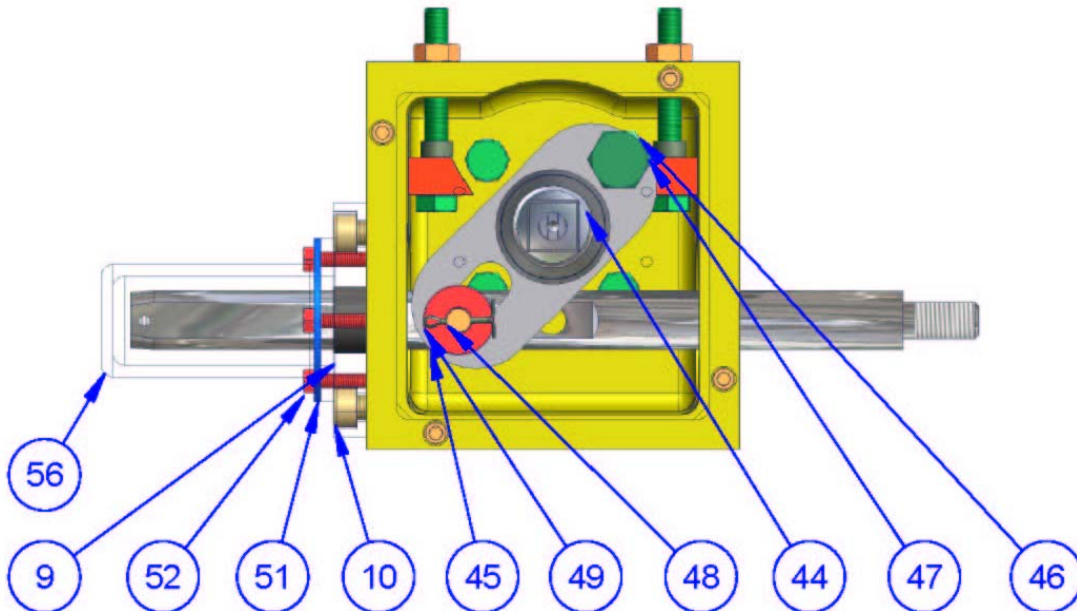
Rotary Actuator with Double Crank Mechanism
